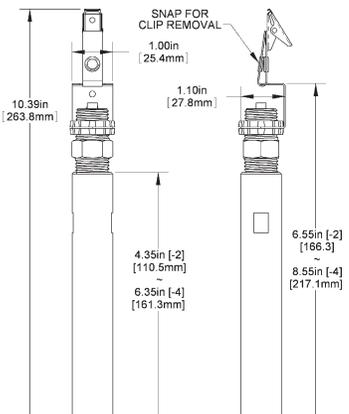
BB2, 2" & 4" Buffer w/SS Threaded Fitting
